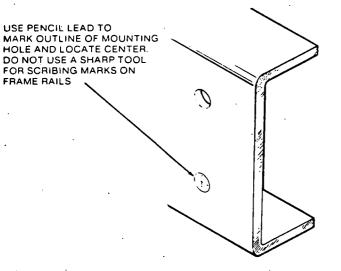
FIGURE MARKING HOLE LOCATION ON TRUCK FRAME RAIL
